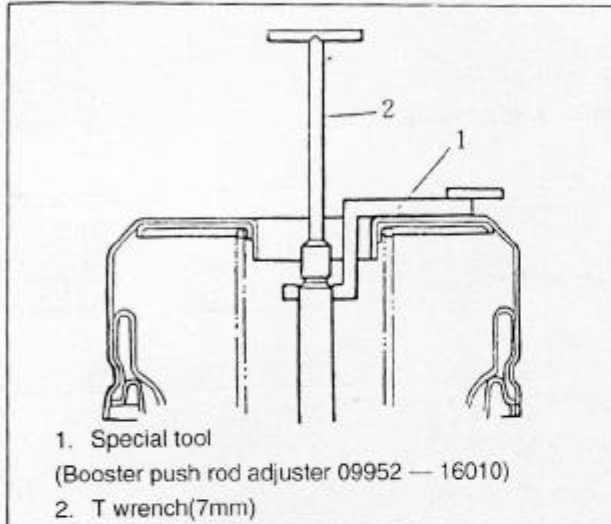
34 PUSH ROD LENGTH ADJUSTMENT
